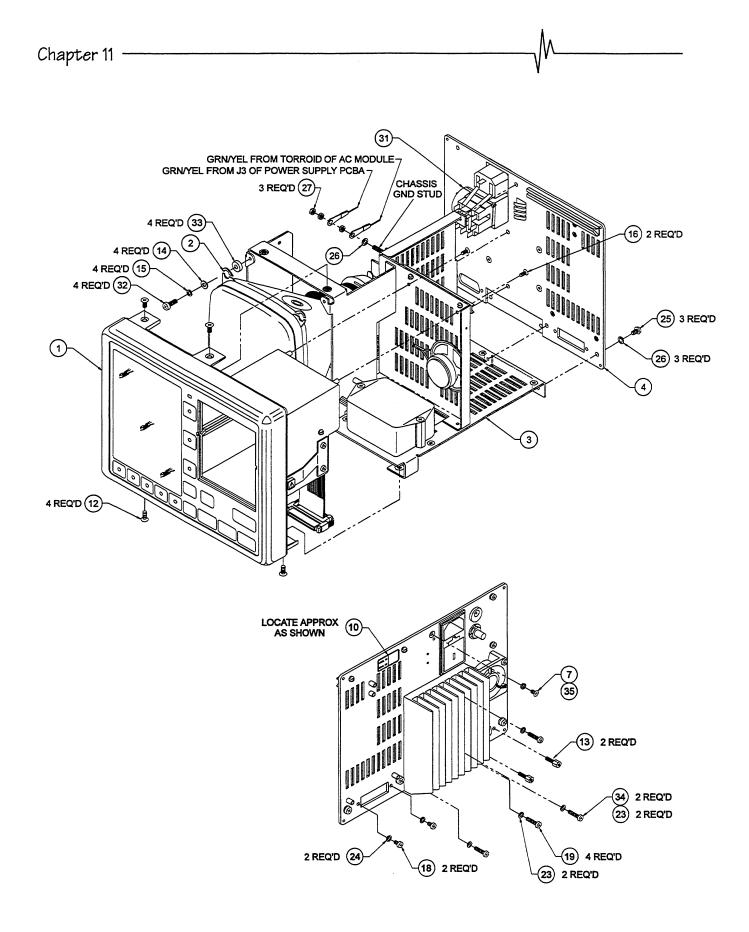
Model 20100 - Exploded View (Mechanical Assembly)
